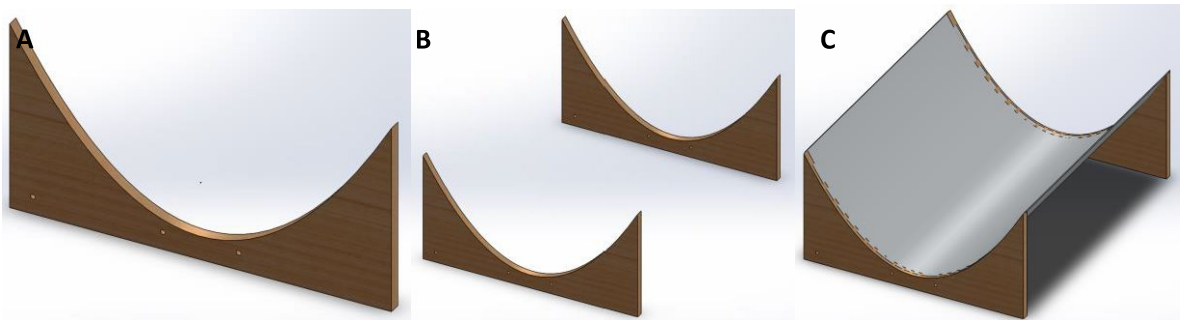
SOLIDWORKS assembly of the Parabolic trough
